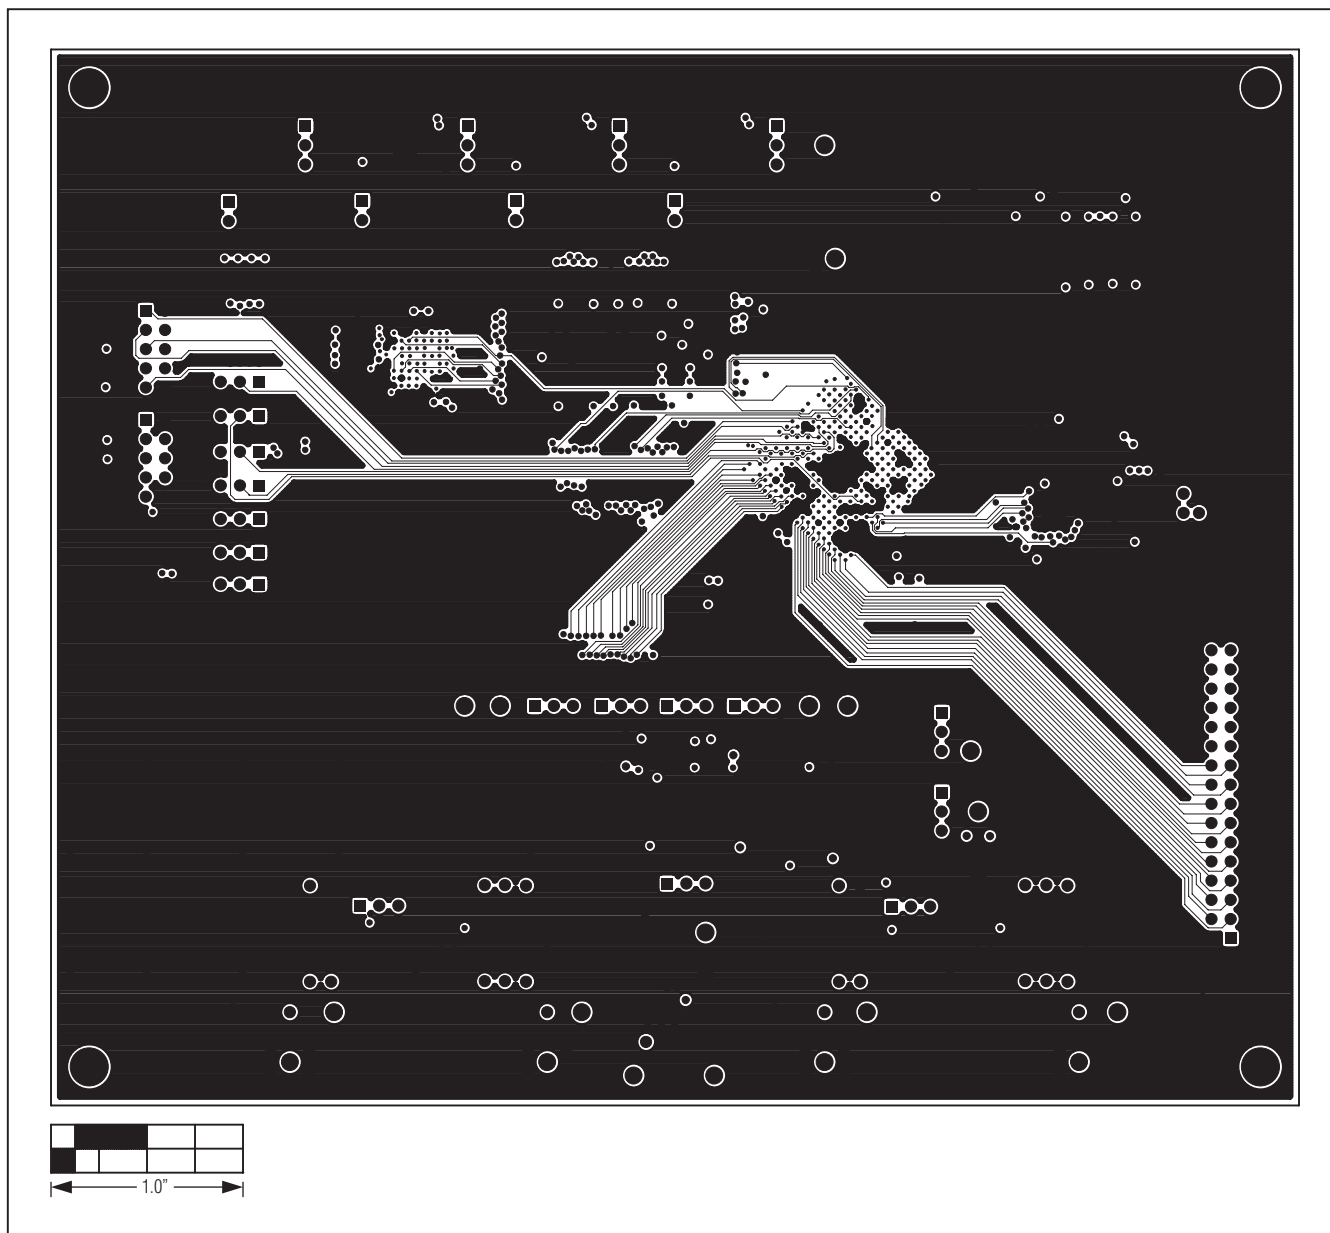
MAX11666 EV Kit PCB Layout—Layer 3
